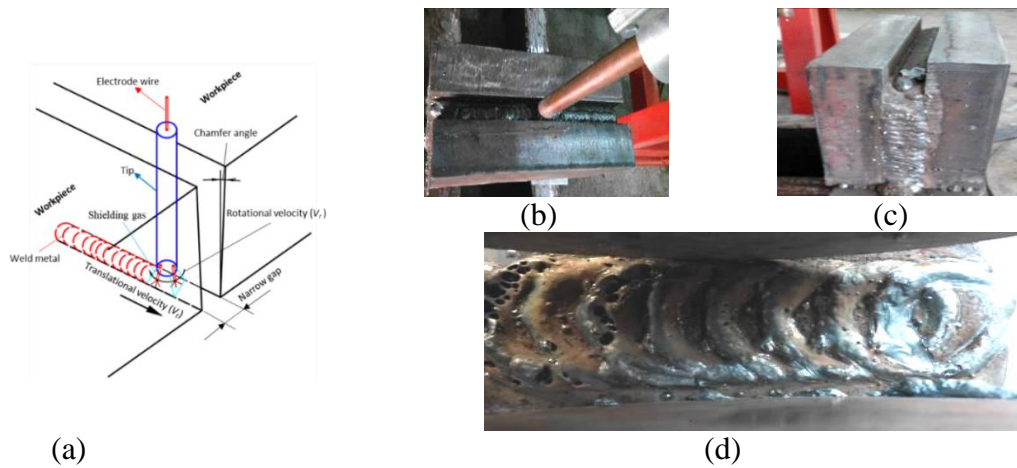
Experiment of MAG welding for butt joints of thick plate with narrow gap: (a) Welding diagram; (b) The welding tip in the gap during welding; (c) Specimen at a time when several completed layers; (d) Surface of a welded layer.
